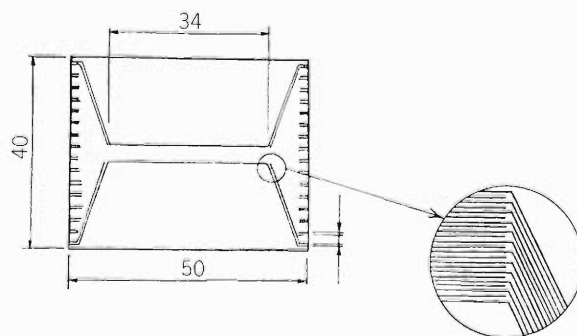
Multi-wire beam sensor. Detailed drawing of the wire strips is shown in the circle.
